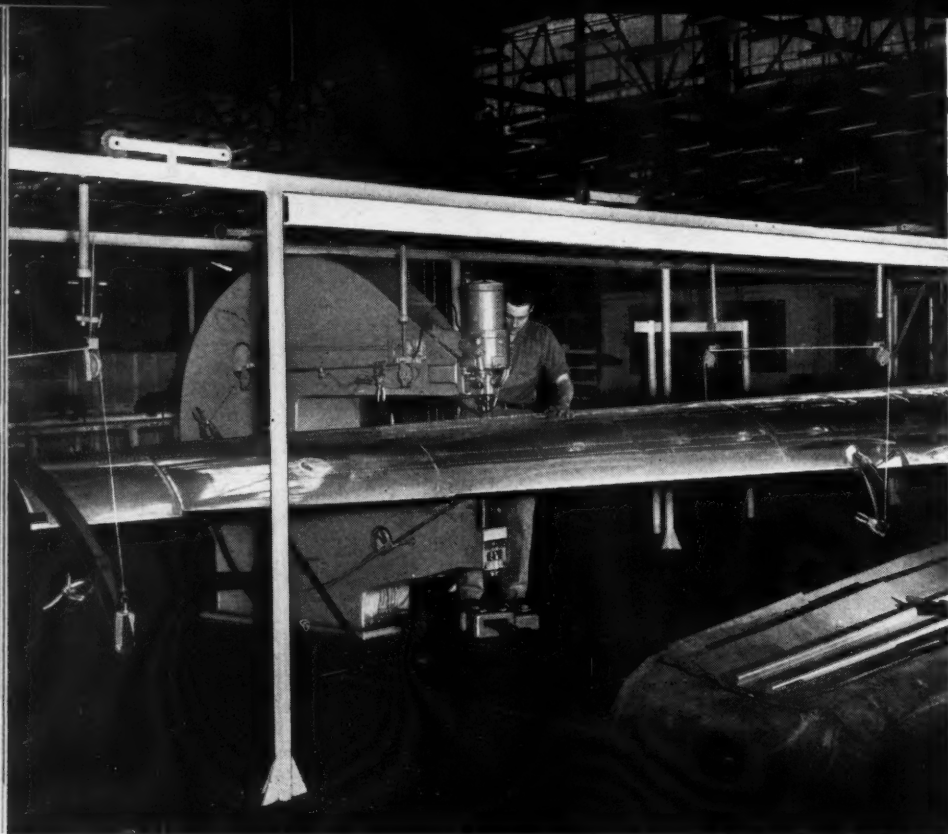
Large parts, which are spring-suspended from an overhead roller conveyor, can be fed through an automatic riveting machine by one operator
